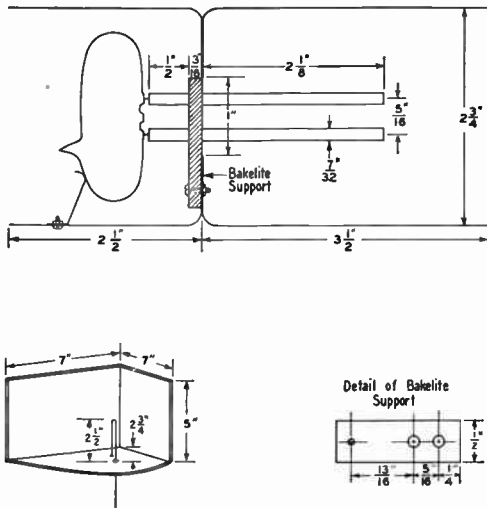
Detail drawing of the 703A oscillator for 1215 Mc.
